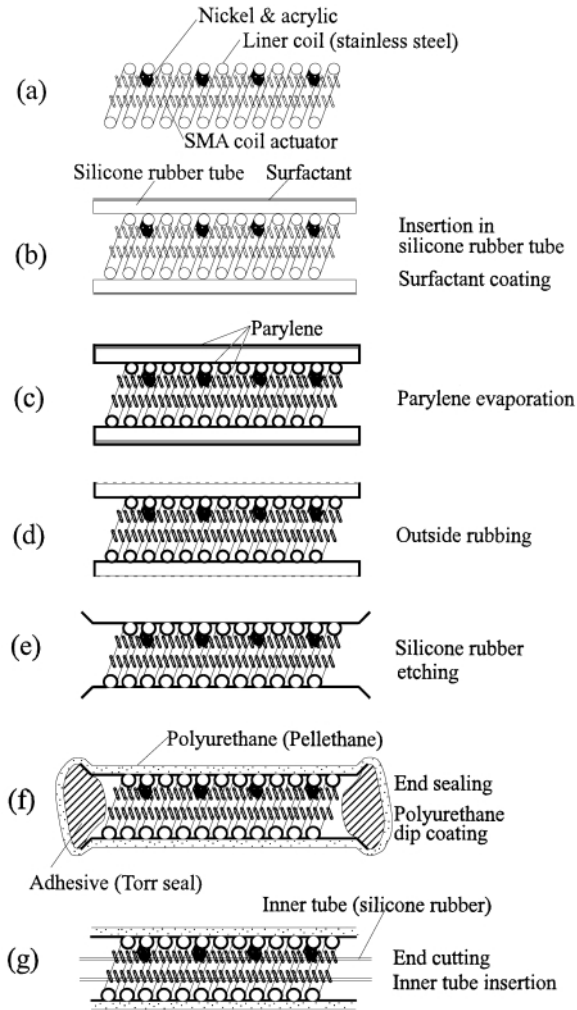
Process flow of polyurethane outer tube on active bending mechanism.
